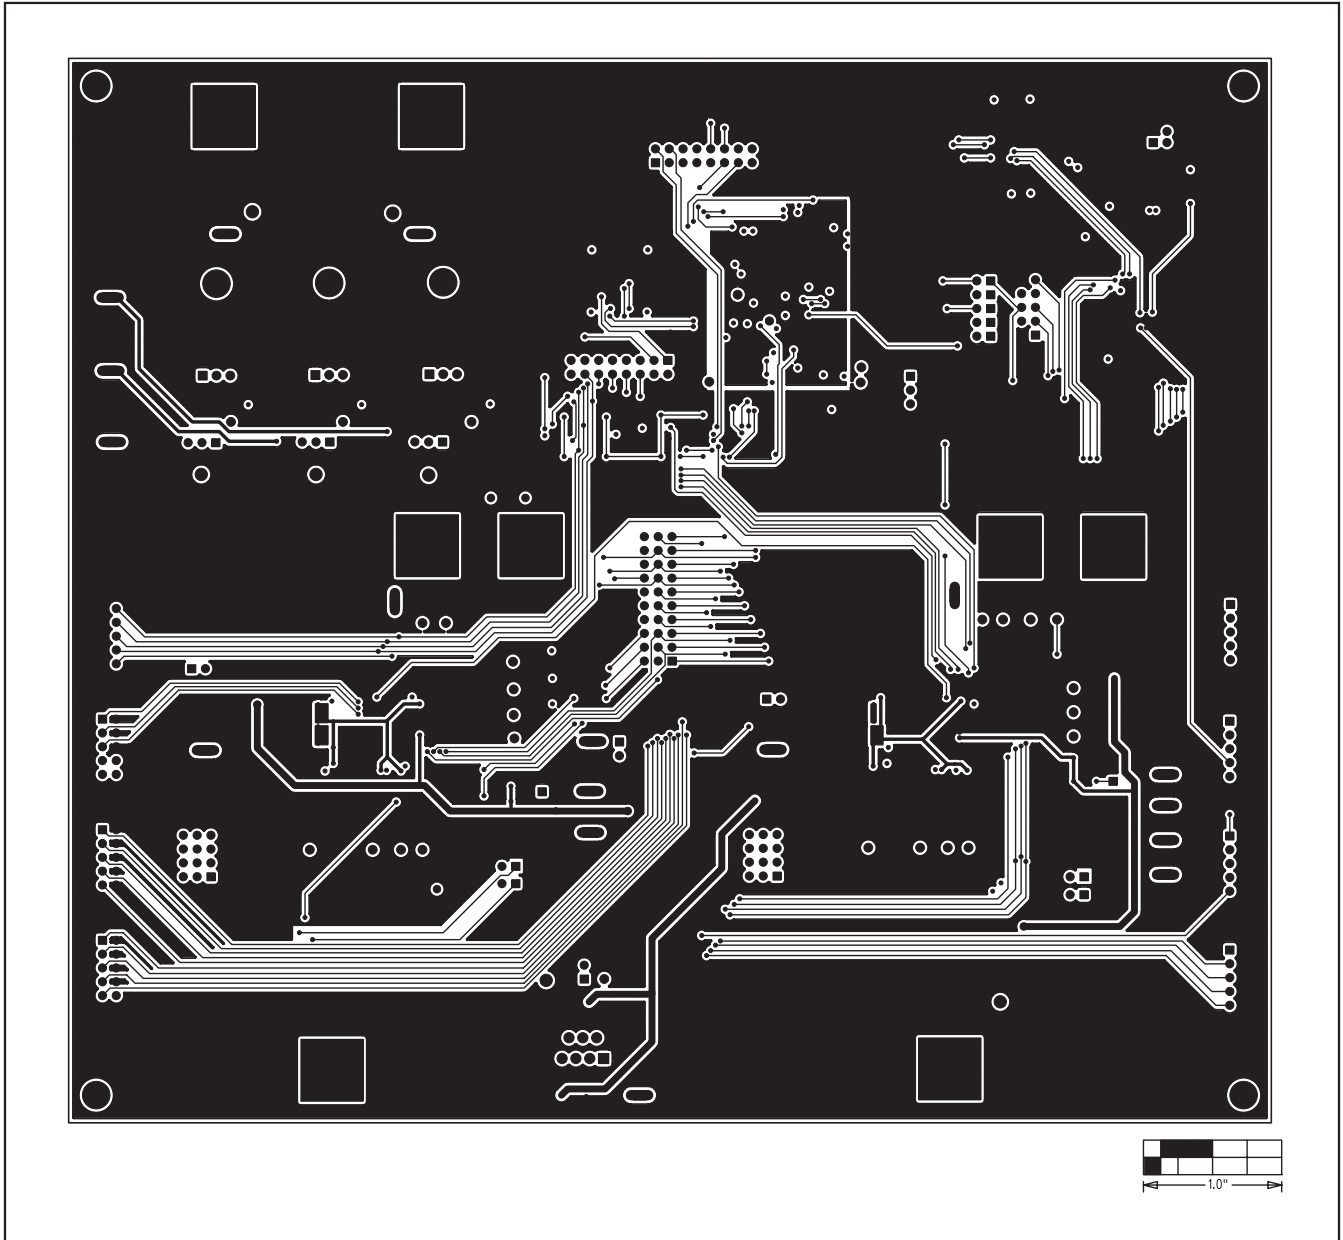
MAX9959 EV Kit PCB Layout—Solder Side
